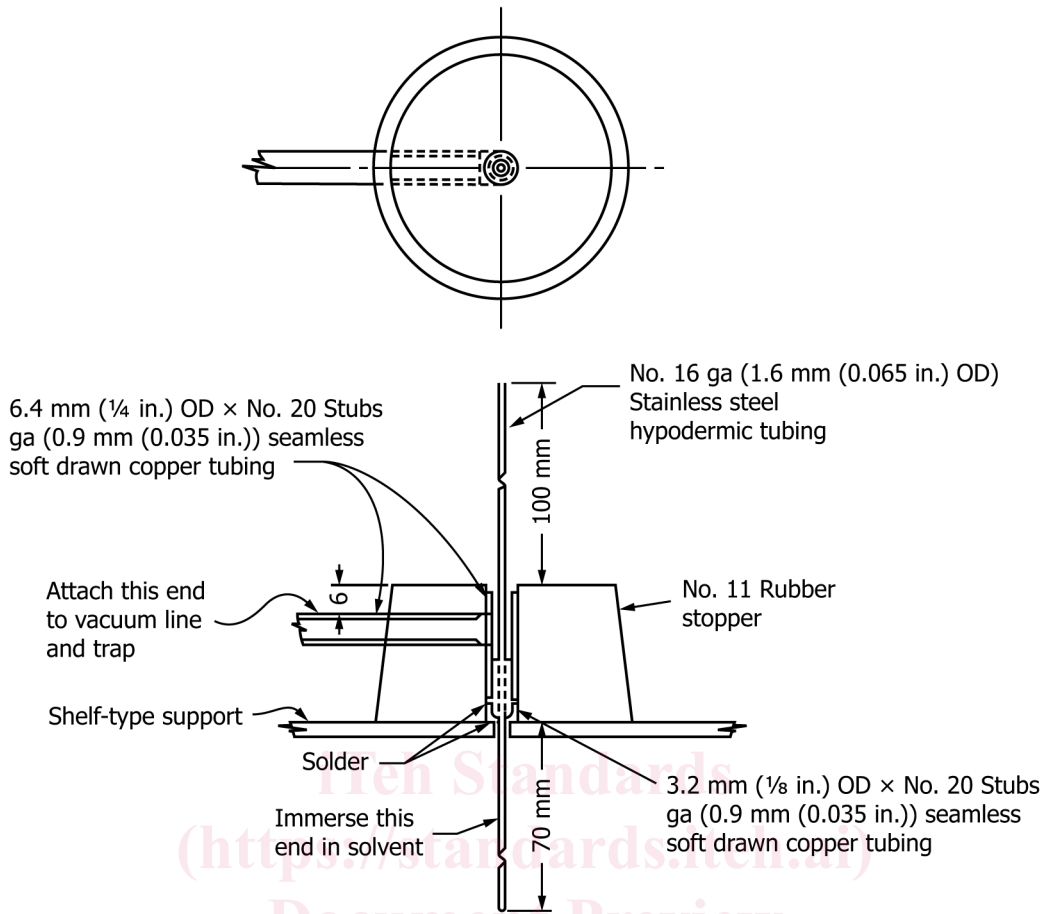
Cleaner Assembly for Bingham-Type Pycnometer
